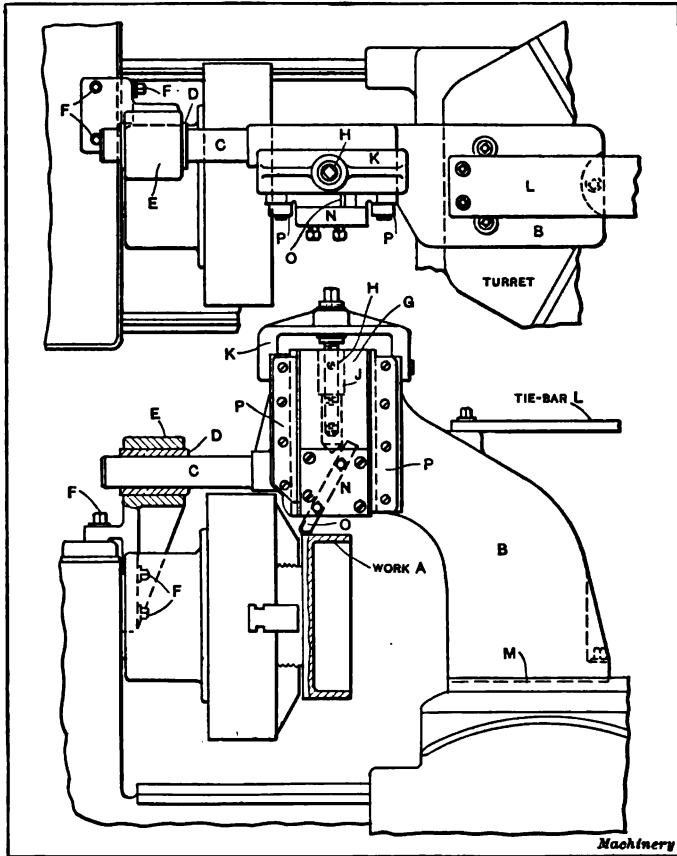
Adjustable Piloted Turning Tool for Large Work
